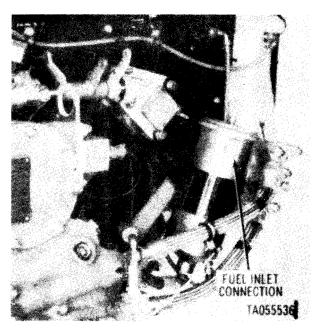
Installed primary fuel filter, model AVDS-1790-2DR engine.
